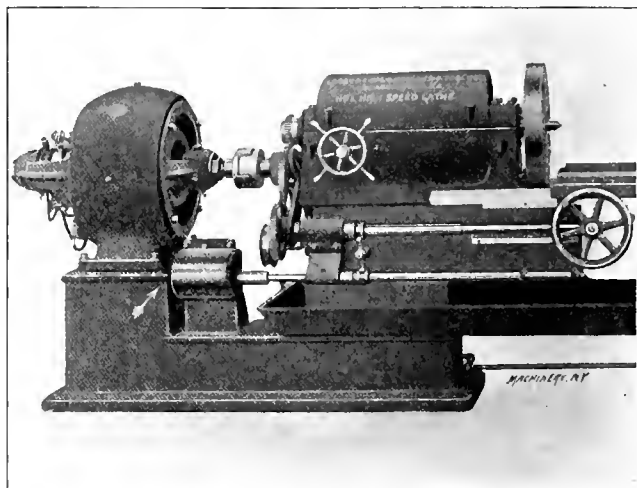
Lodge & Shipley Lathe operated by "Northern" Motor, with Cutler-Hammer Direct-driven Drum Controller.
